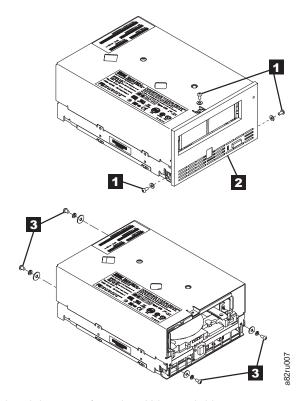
Removing the bezel and the cover from the 4U internal drive
